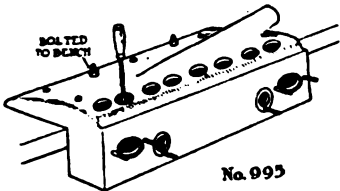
McCullough valve reseating tool consists of a carborundum cloth cone held to the face of the valve as shown. The valve is used just the same as a reamer. The cloth cutting the seat in the cylinder exactly the same bevel as that of the valve face. No reamers are required. There is nothing to replace but the carborundum cloth. Emery cloth or sand paper will do quite as well but will not last as long.
